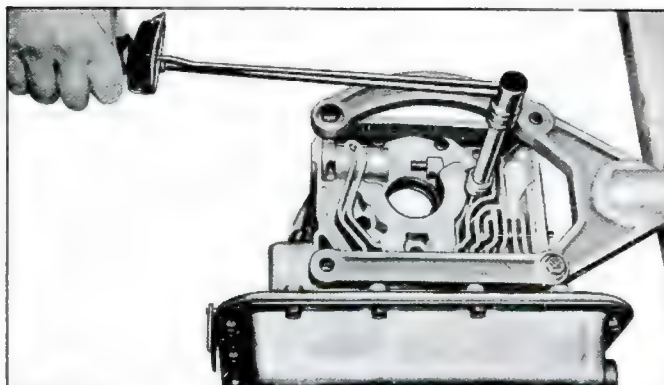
E-50—Measuring Rear Pump and Reverse Piston Bolt Torque
